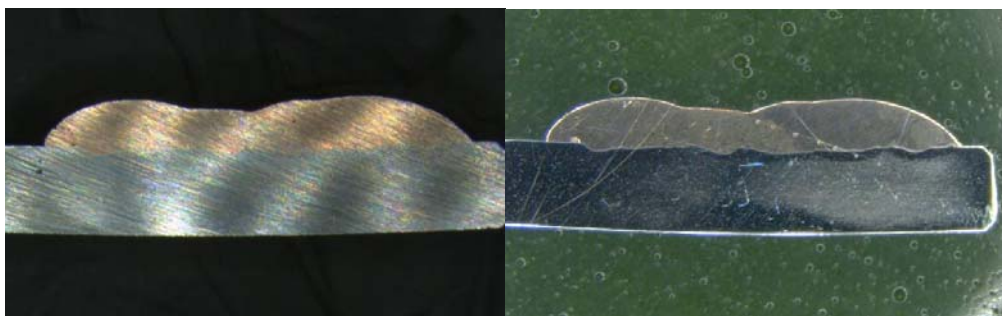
Macroscopic cross-section of Cu to stainless steel deposition.
